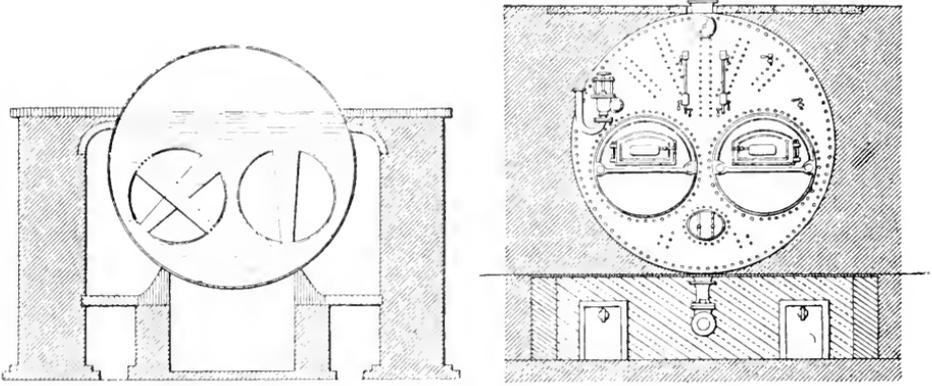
CROSS SECTION AND FRONT ELEVATION OF LANCASHIRE BOILER.
